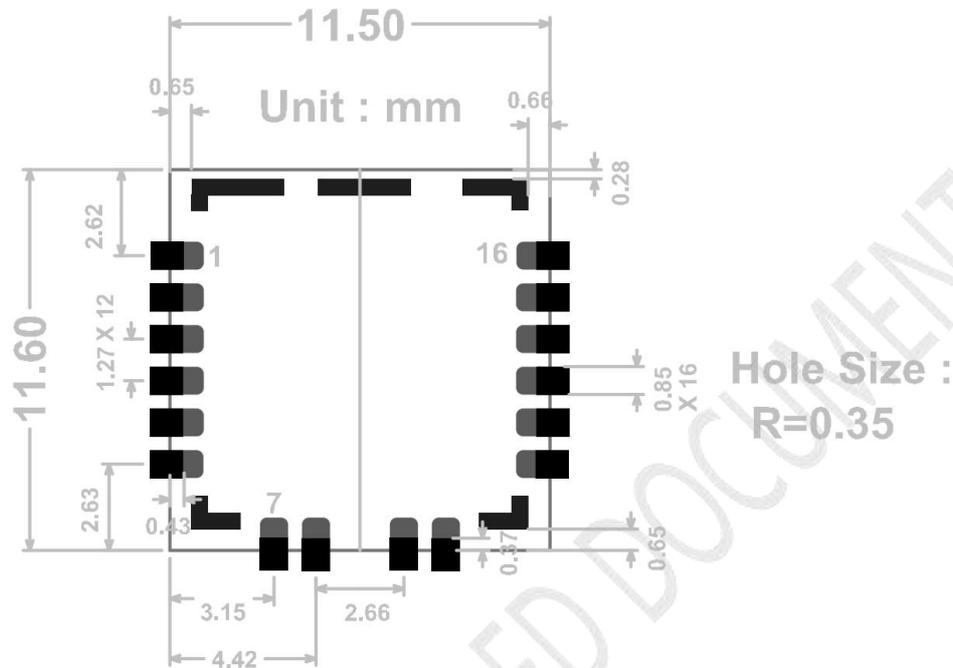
HJ-P30xx_LD mechanical dimensions
